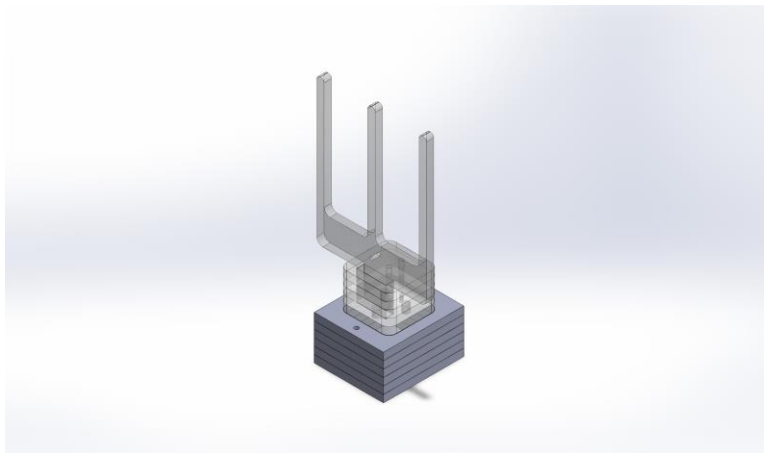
CAD model of Universal Receiver (gray) and aligned tray fork tool.
